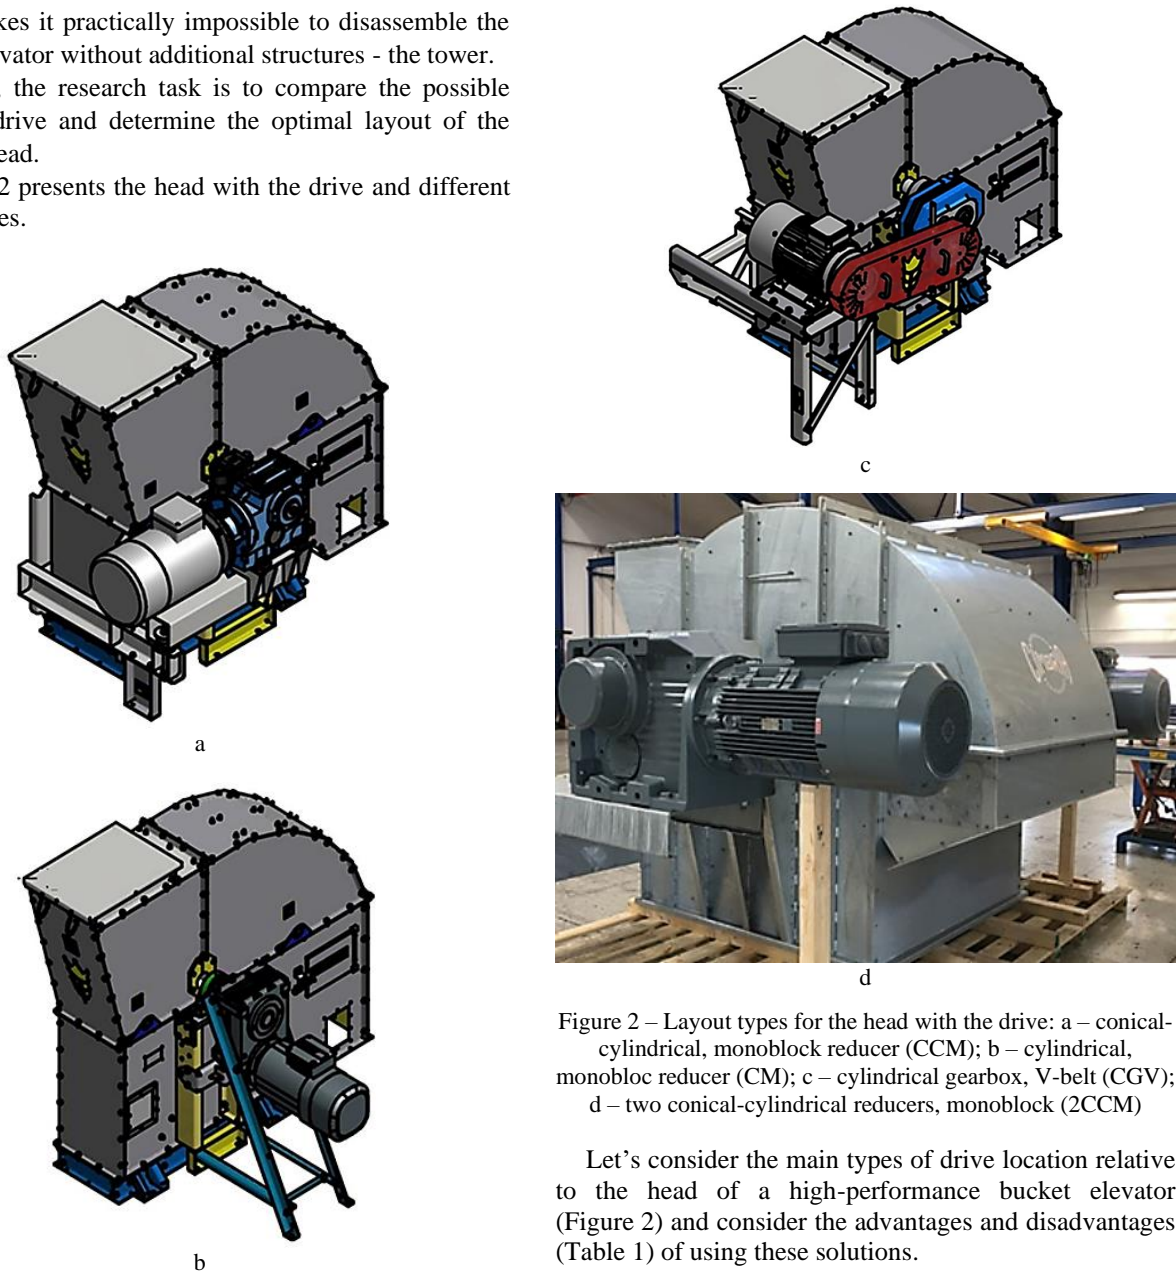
Layout types for the head with the drive: a – conical-cylindrical, monoblock reducer (CCM); b – cylindrical, monobloc reducer (CM); c – cylindrical gearbox, V-belt (CGV); d – two conical-cylindrical reducers, monoblock (2CCM)
